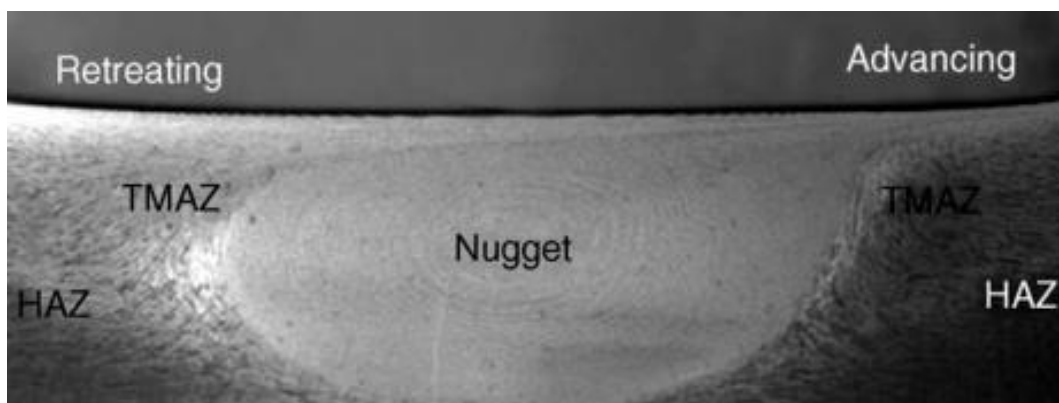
Various microstructural regions in the transverse cross section of a friction stir welded material FSP 7075Al-T651 (standard threaded pin, 400 rpm, and 51 mm/min) [25].
